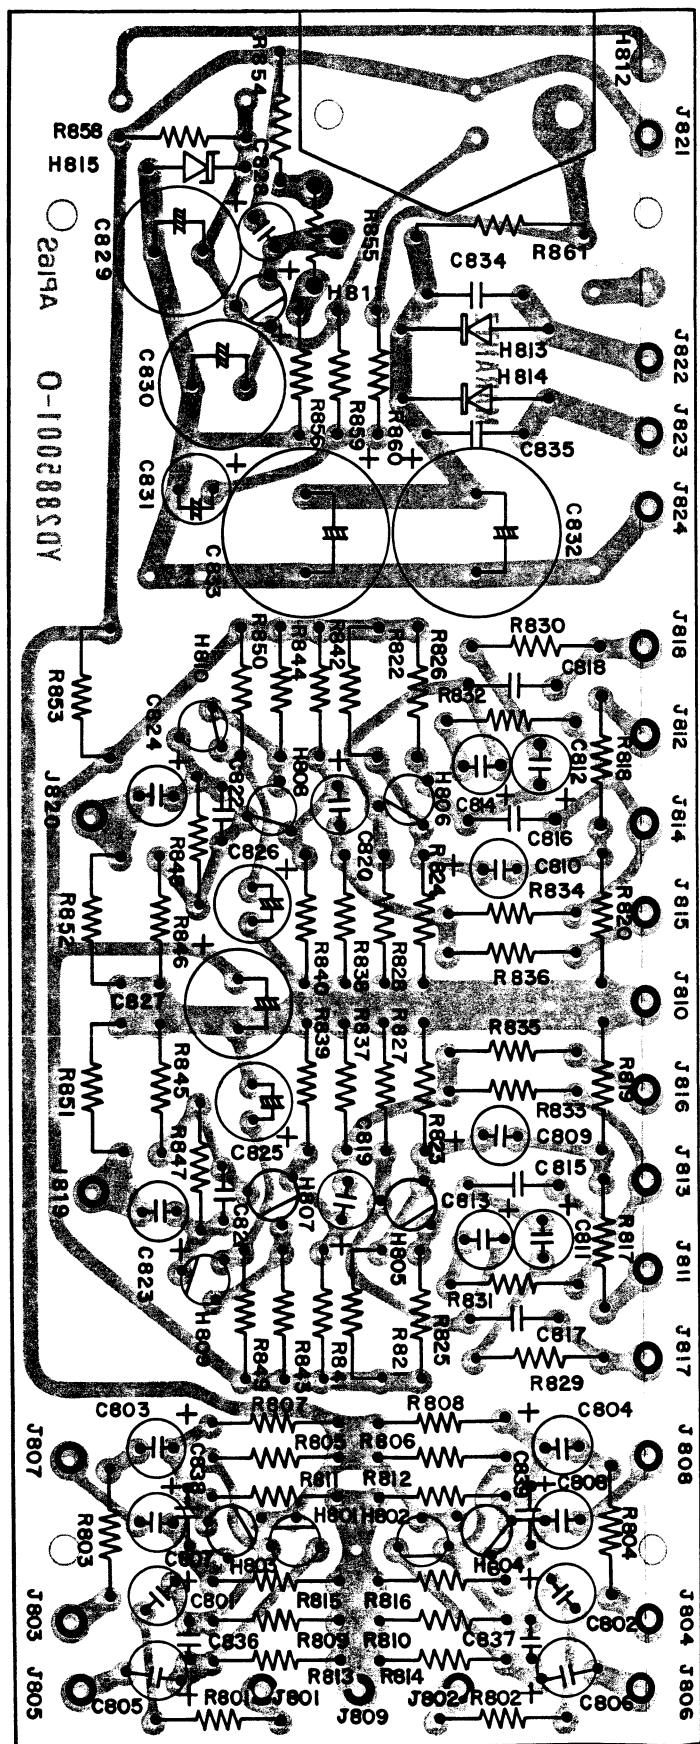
Power Supply, Vari-Matrix, Buffer Amplifier Unit Assembly P800 Component Locations
